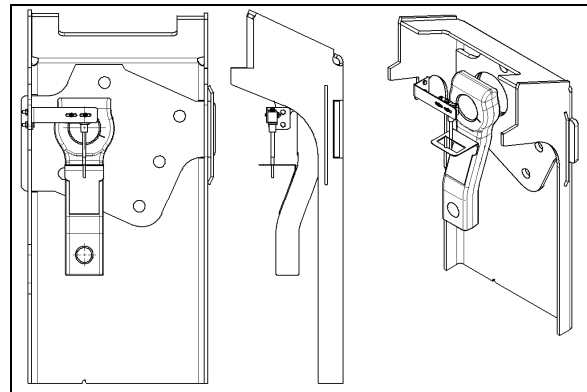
TAG AXLE UNLOADING SWITCH ADJUSTMENT
